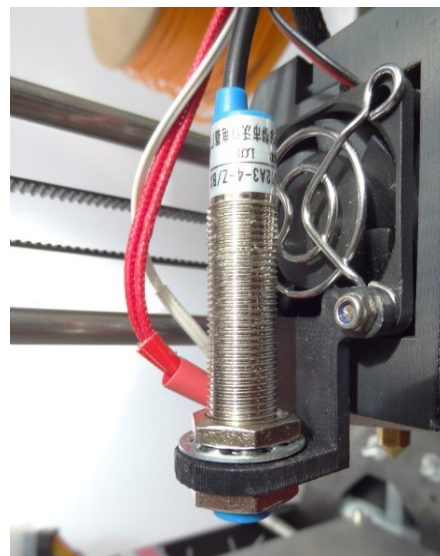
The holder, the mounting and location of the inductive sensor relative to the extruder nozzle [own elaboration]
